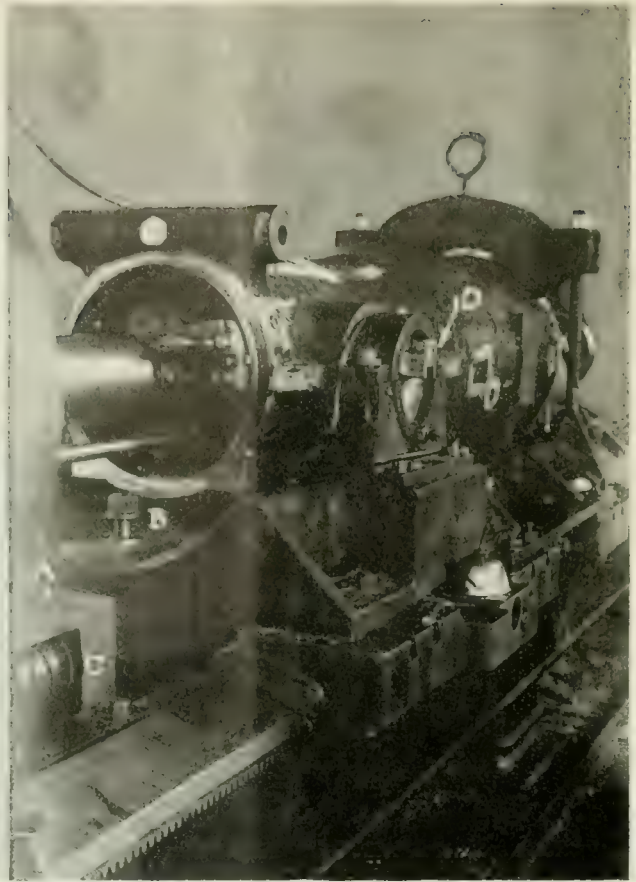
PROFILING THE KNIFE EDGE BEARING.
